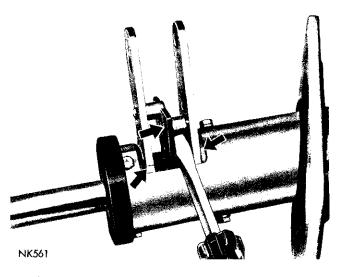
Column-Mounted Manual Transmission Gearshift Control—Lubrication Points
